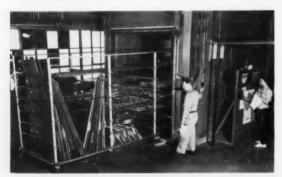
Parts to be artificially aged are loaded on racks or special fixtures and conveyed into furnaces.
